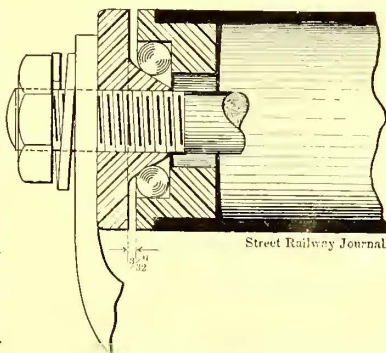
SECTION SHOWING BALL BEARINGS.
